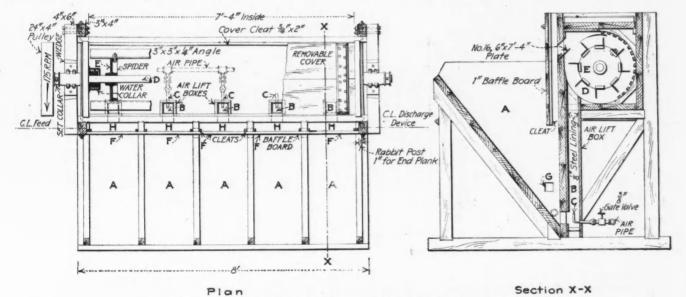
PLAN AND SECTIONAL VIEW OF ZEIGLER FLOTATION MACHINE
